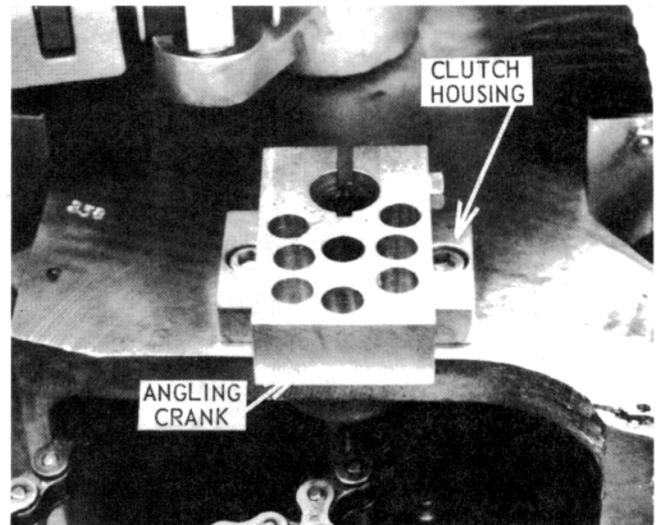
Angling Crank, Angling Shaft Thrust Bearing, and Angling Shaft Clutch Housing
